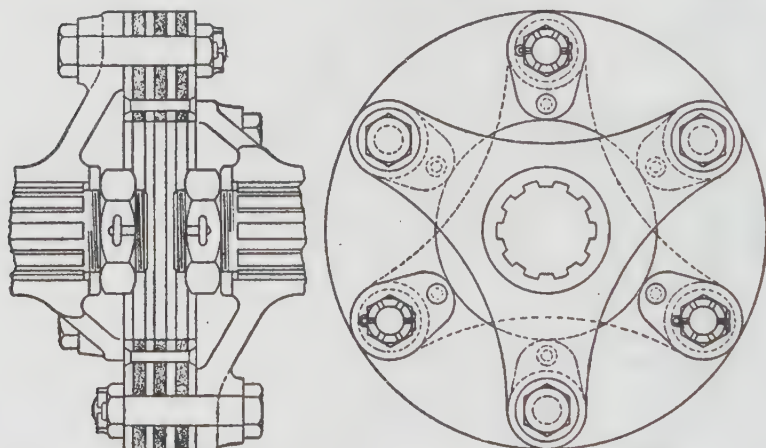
TYPICAL DESIGN OF LEATHER DISC UNIVERSAL JOINT.
